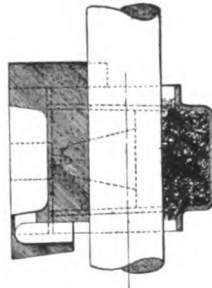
OUTSIDE SELF-LUBRICATING PEDESTAL.
